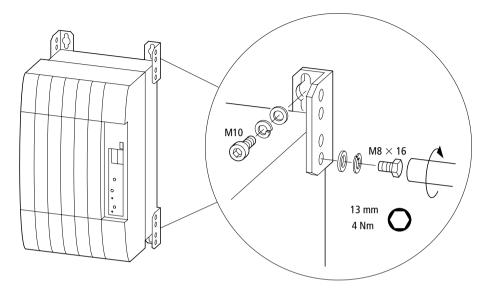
Fixing to the mounting plate (DF4-341-45K to 90K)
